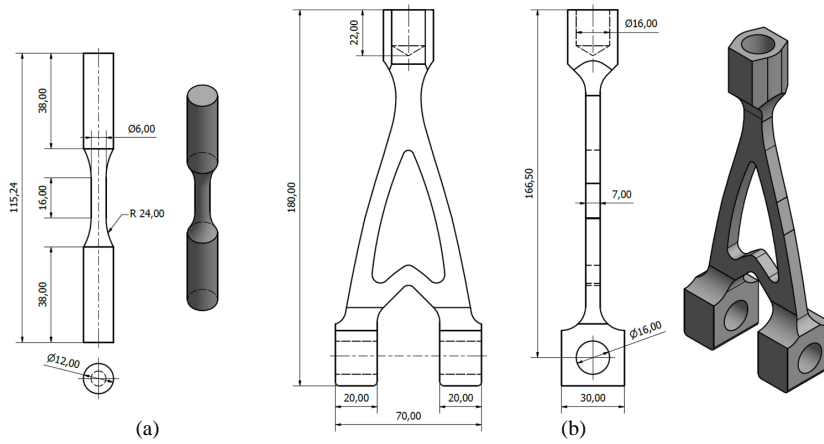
Specimens tested: a) cylindrical specimens and b) benchmark component.
